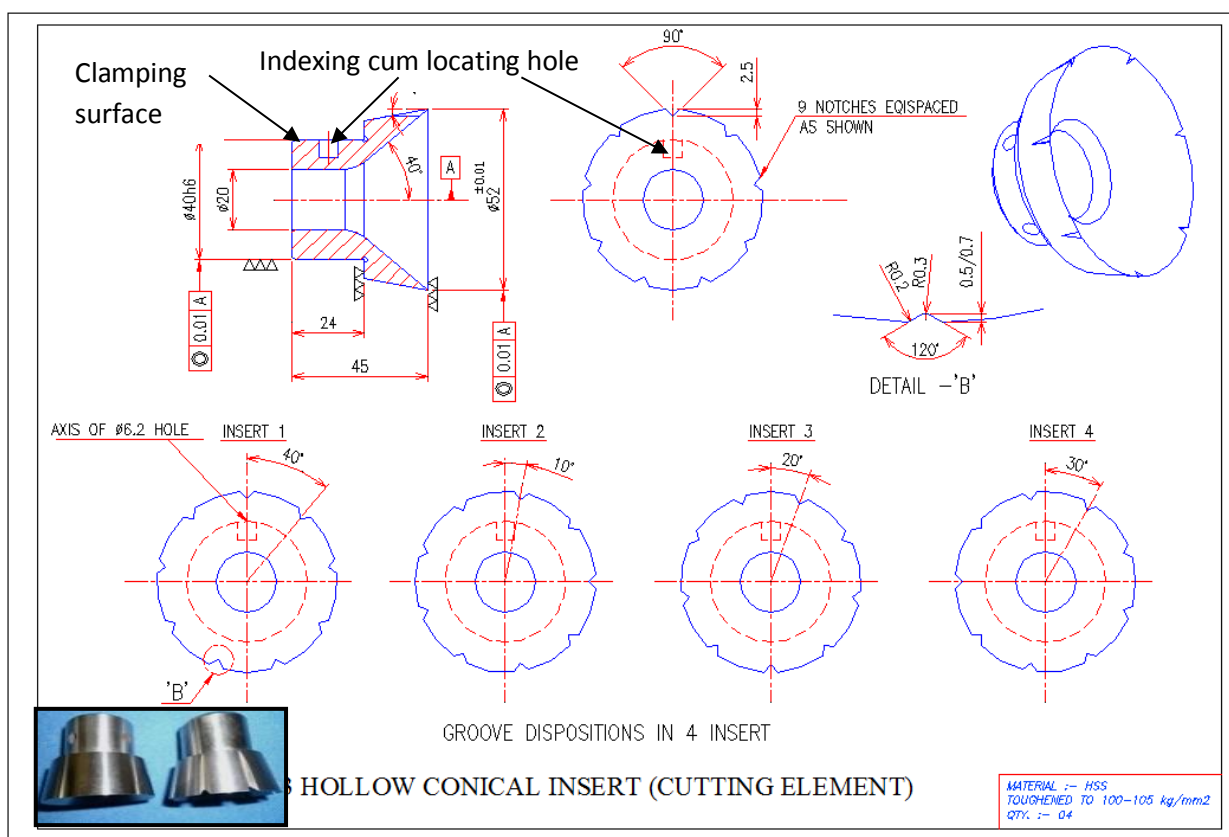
Insert design details and Indexing cum locating holes on the insert clamp surface
